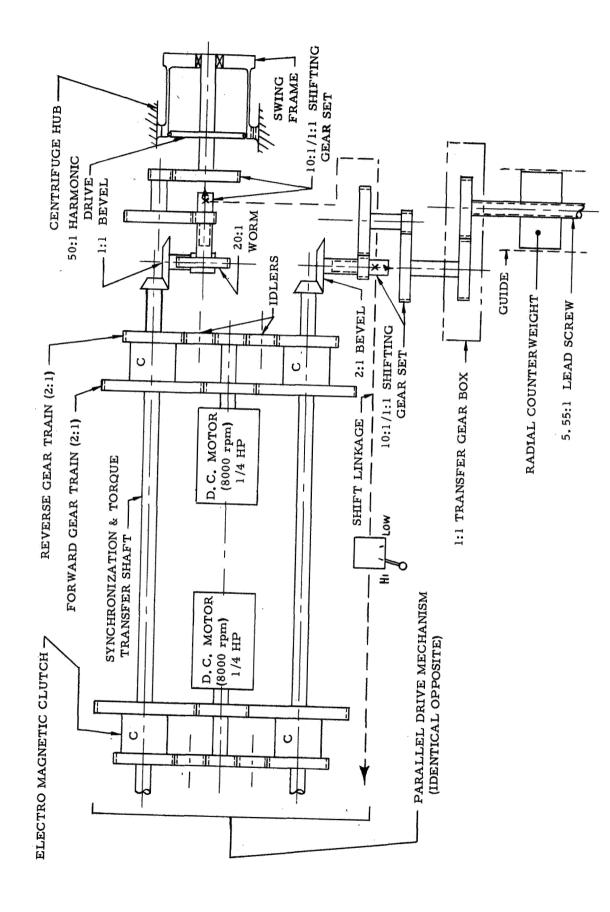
Schematic Diagram - Combined Swing and Radial Drive Mechanism for the Counter weight
